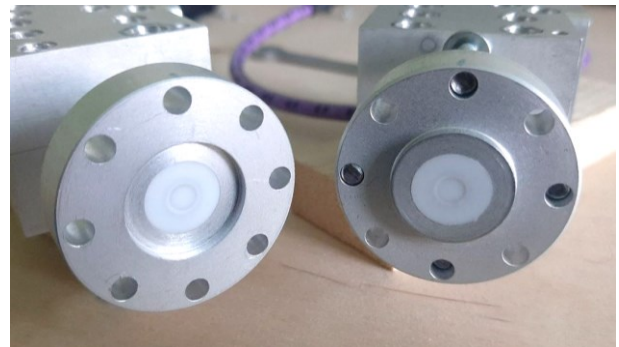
Manufactured K/Q band coaxial joint prototype.
